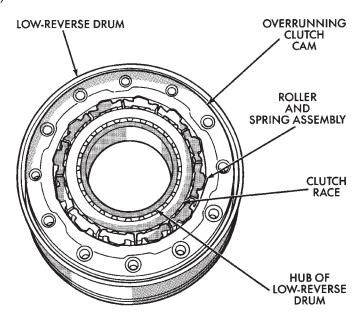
Temporary Assembly Of Clutch And Drum To Check Operation
